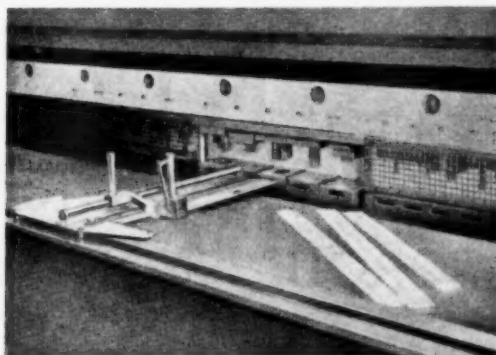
Sliding fixtures with index fingers and templates are used to obtain proper spacing of various types of holes in flat mounting panels.
